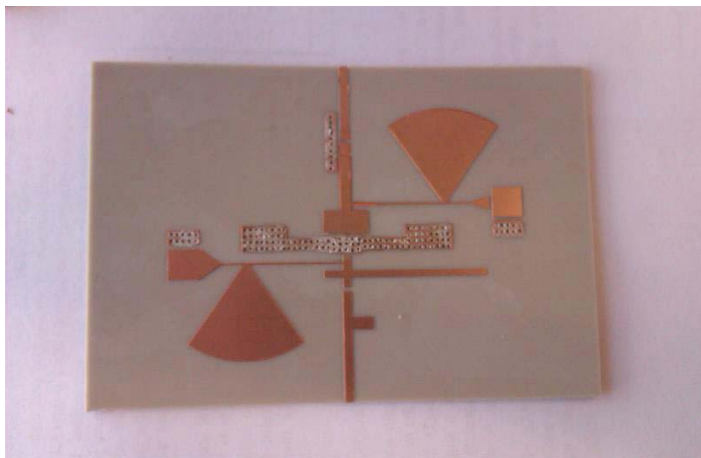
Top view of the layout of the board after the peeling phase shown in Figure 2.11.
